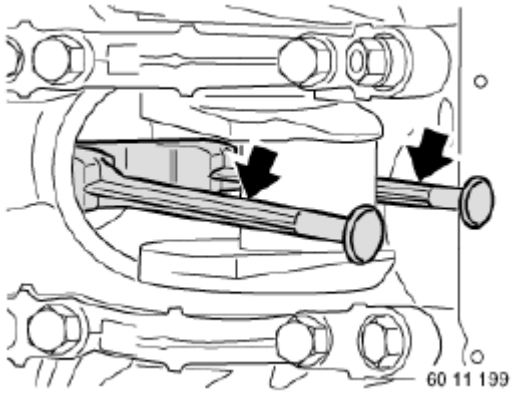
Pressing Piston With Special Tool (11 2 260)
